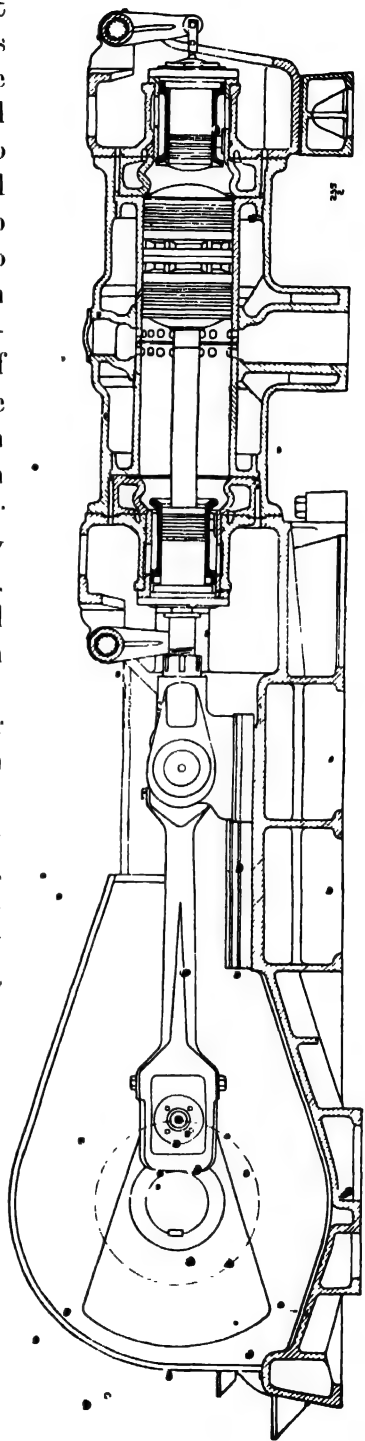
Sectional Elevation of Cylinders and Crank of Illmer Gas-engine
